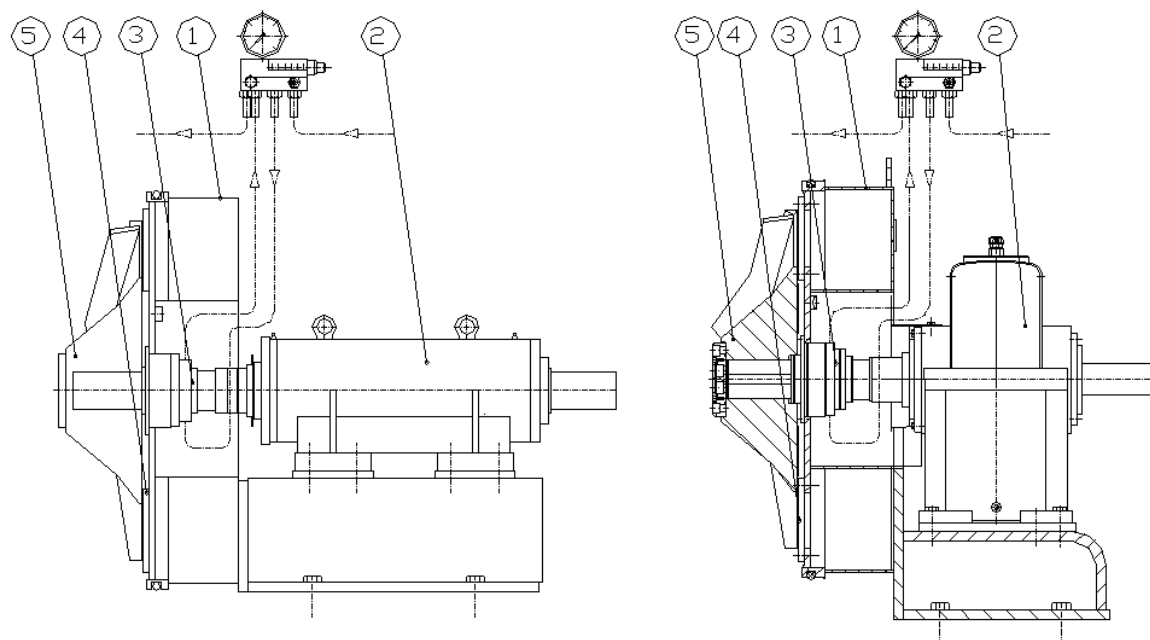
The rotor units, belt-driven on the left and gear-driven on the right (STOA009536)
